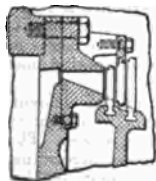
Mounting of Buckets in Curtis Turbine.
